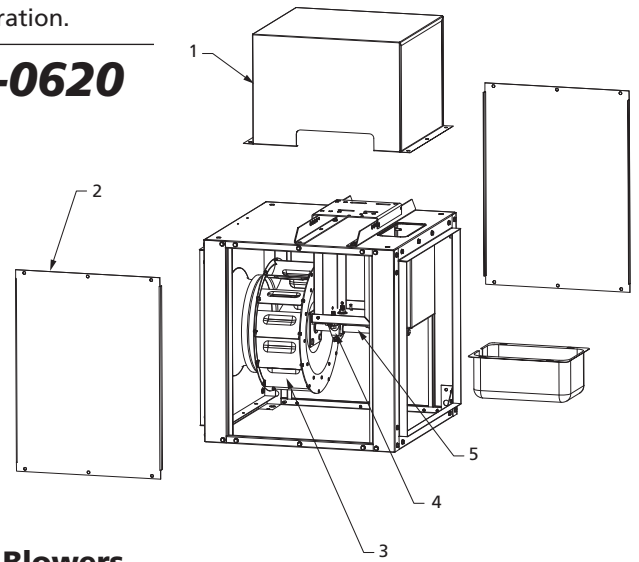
Repair Parts Illustration for Centrifugal Belt-Drive In-Line Blowers
